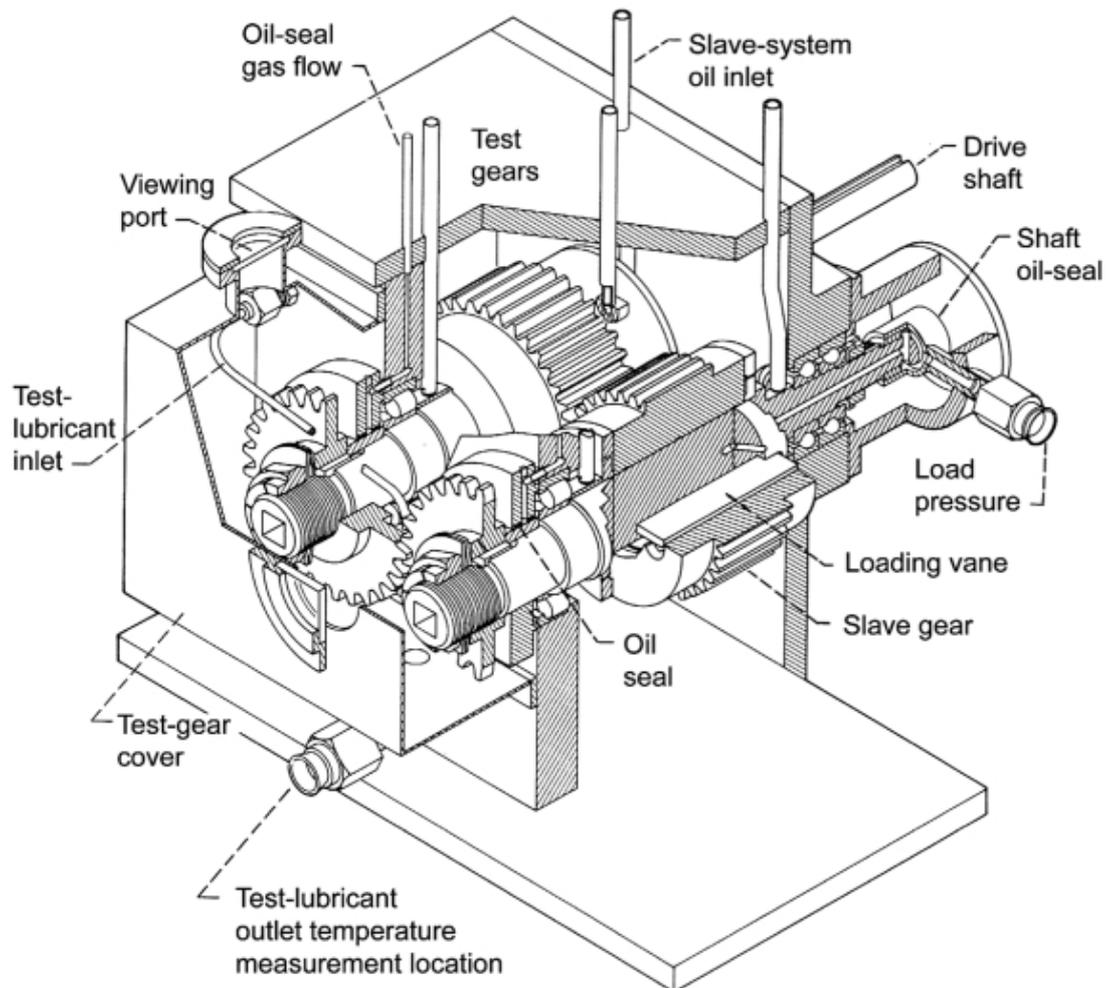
Cutaway Figure of Spur Gears Test Rig (Source: [5])
